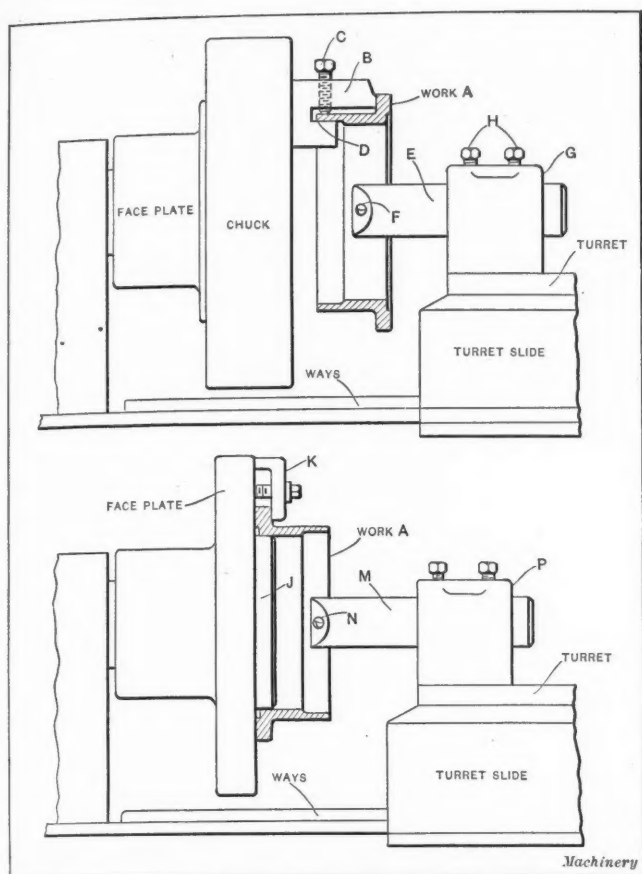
Thin Flanged Collar machined on a Pratt & Whitney Turntable Lathe
